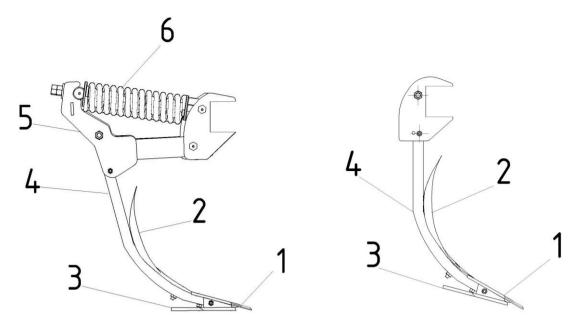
Working components of the TOP cultivator: 1- coulter, 2- right/left shield, 3- tines, 4- plough beam, 5- beam arm*, 6- springs - external and internal*; (* TOP type "S").
